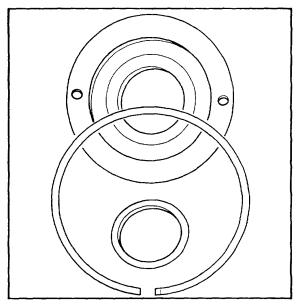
Clutch piston, piston ring and O-ring removed.
